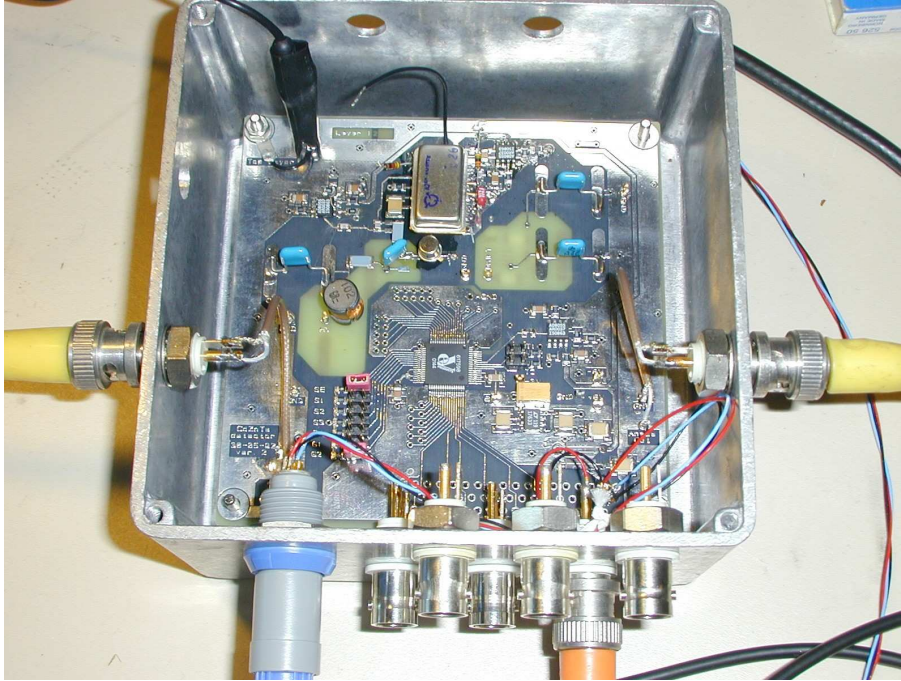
The ASIC chip mounted on a Printed Circuit Board (PCB). The detector is placed on the other side of PCB.
